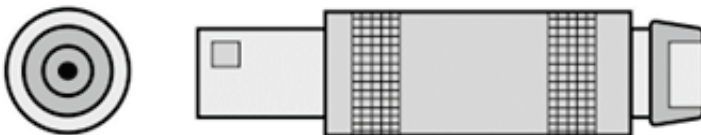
PZT connector, LEMO FFS.00.250.CTCE24, front view
